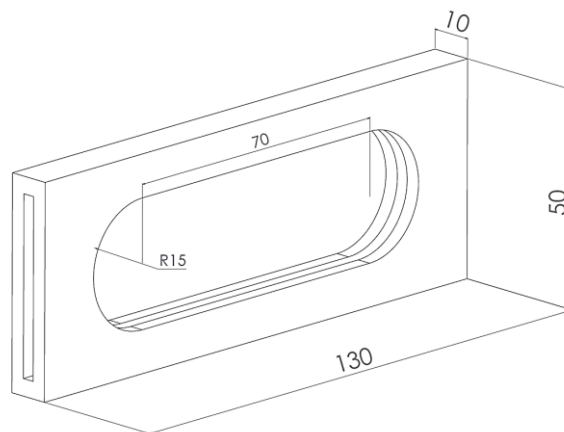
Casing used to frame each glass panel, with dimensions, in mm
